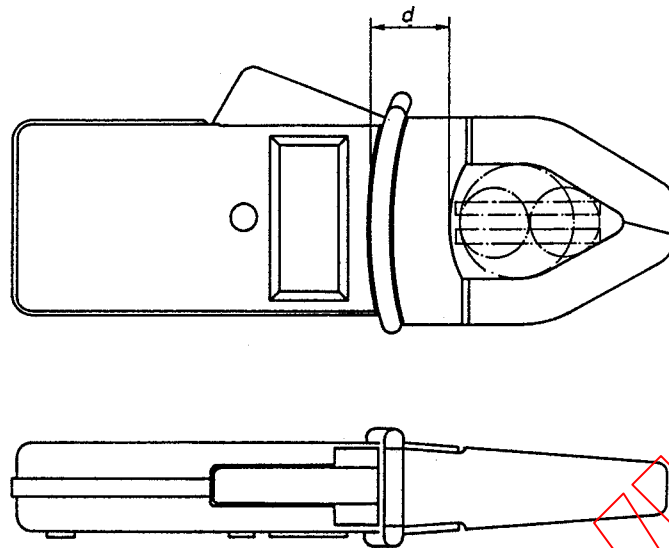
CLEARANCE between BARRIER and conductor showing the lower limit of CLEARANCE
